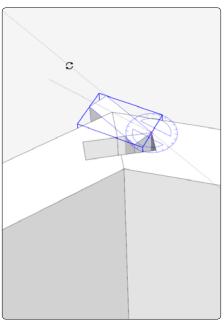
Create the front frame rails in position in the carcase assembly.
